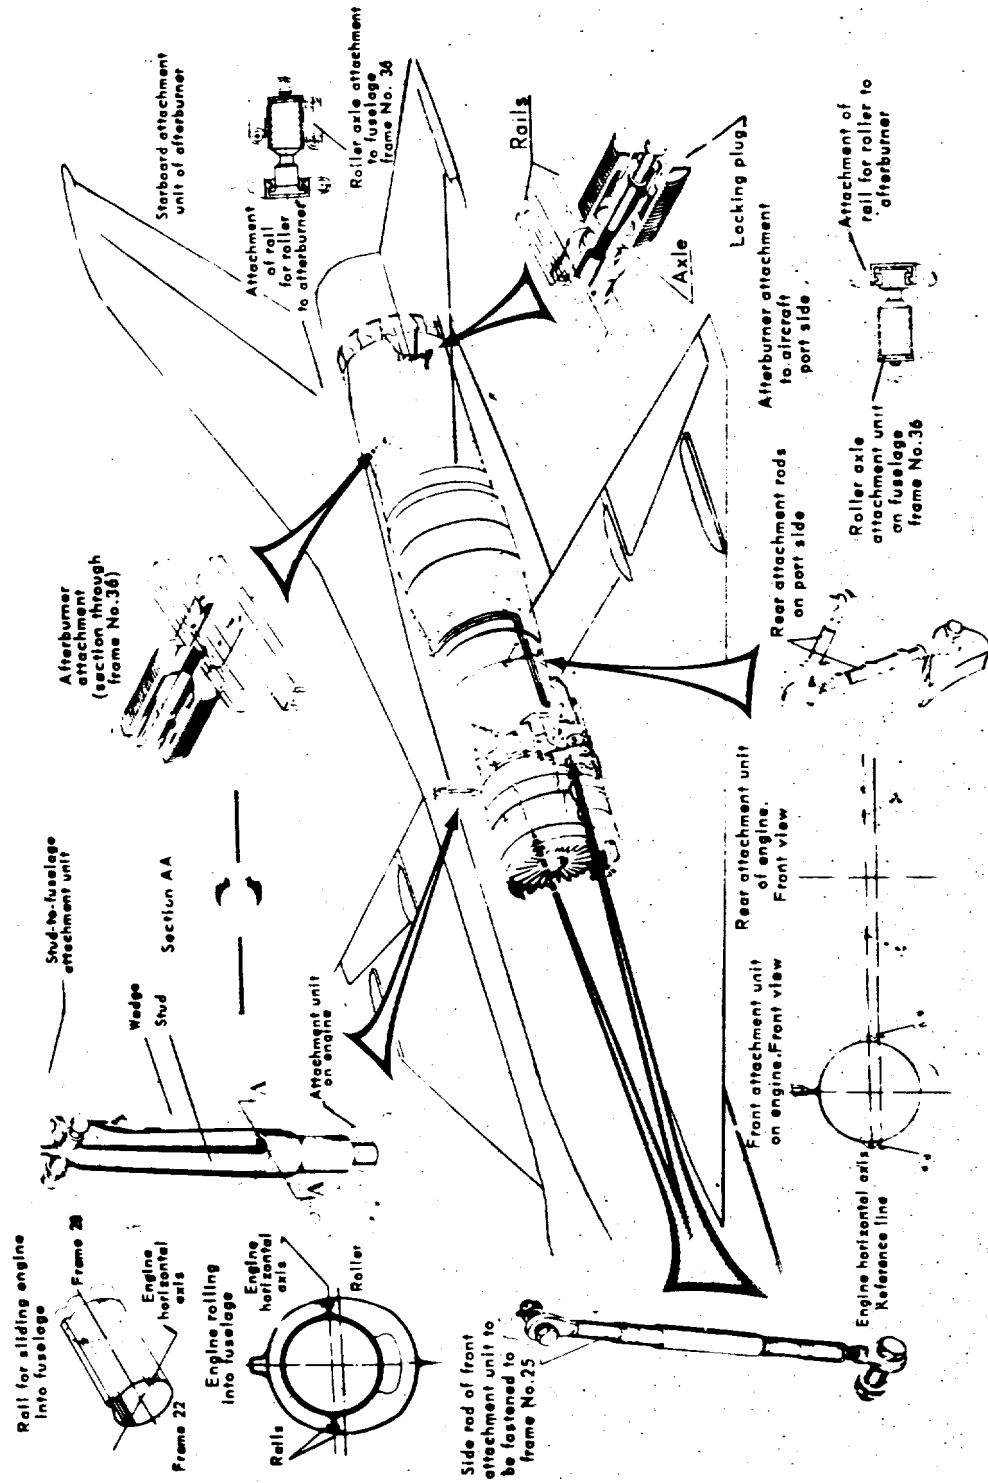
ENGINE AND AFTERBURNER ATTACHMENT
